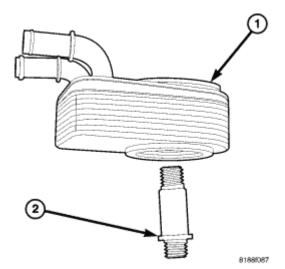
OIL COOLER MOUNTING Courtesy of CHRYSLER LLC
